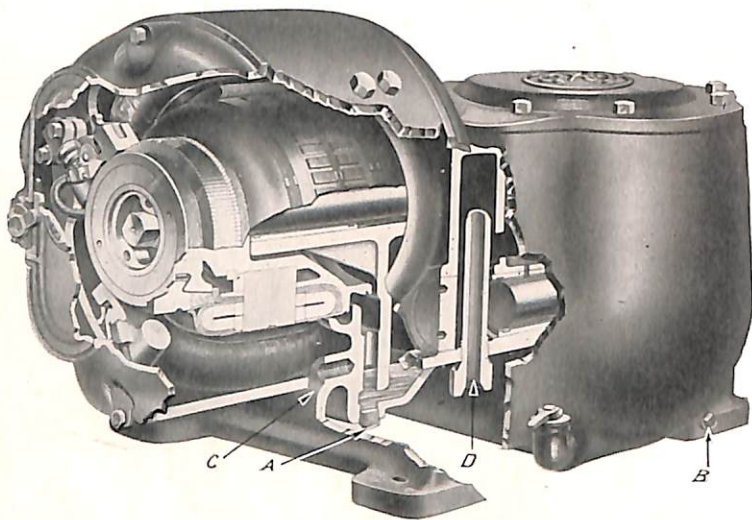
Type CP-27-A Air Compressor Showing Vent Pipe and Oil Return to Crank Chamber
